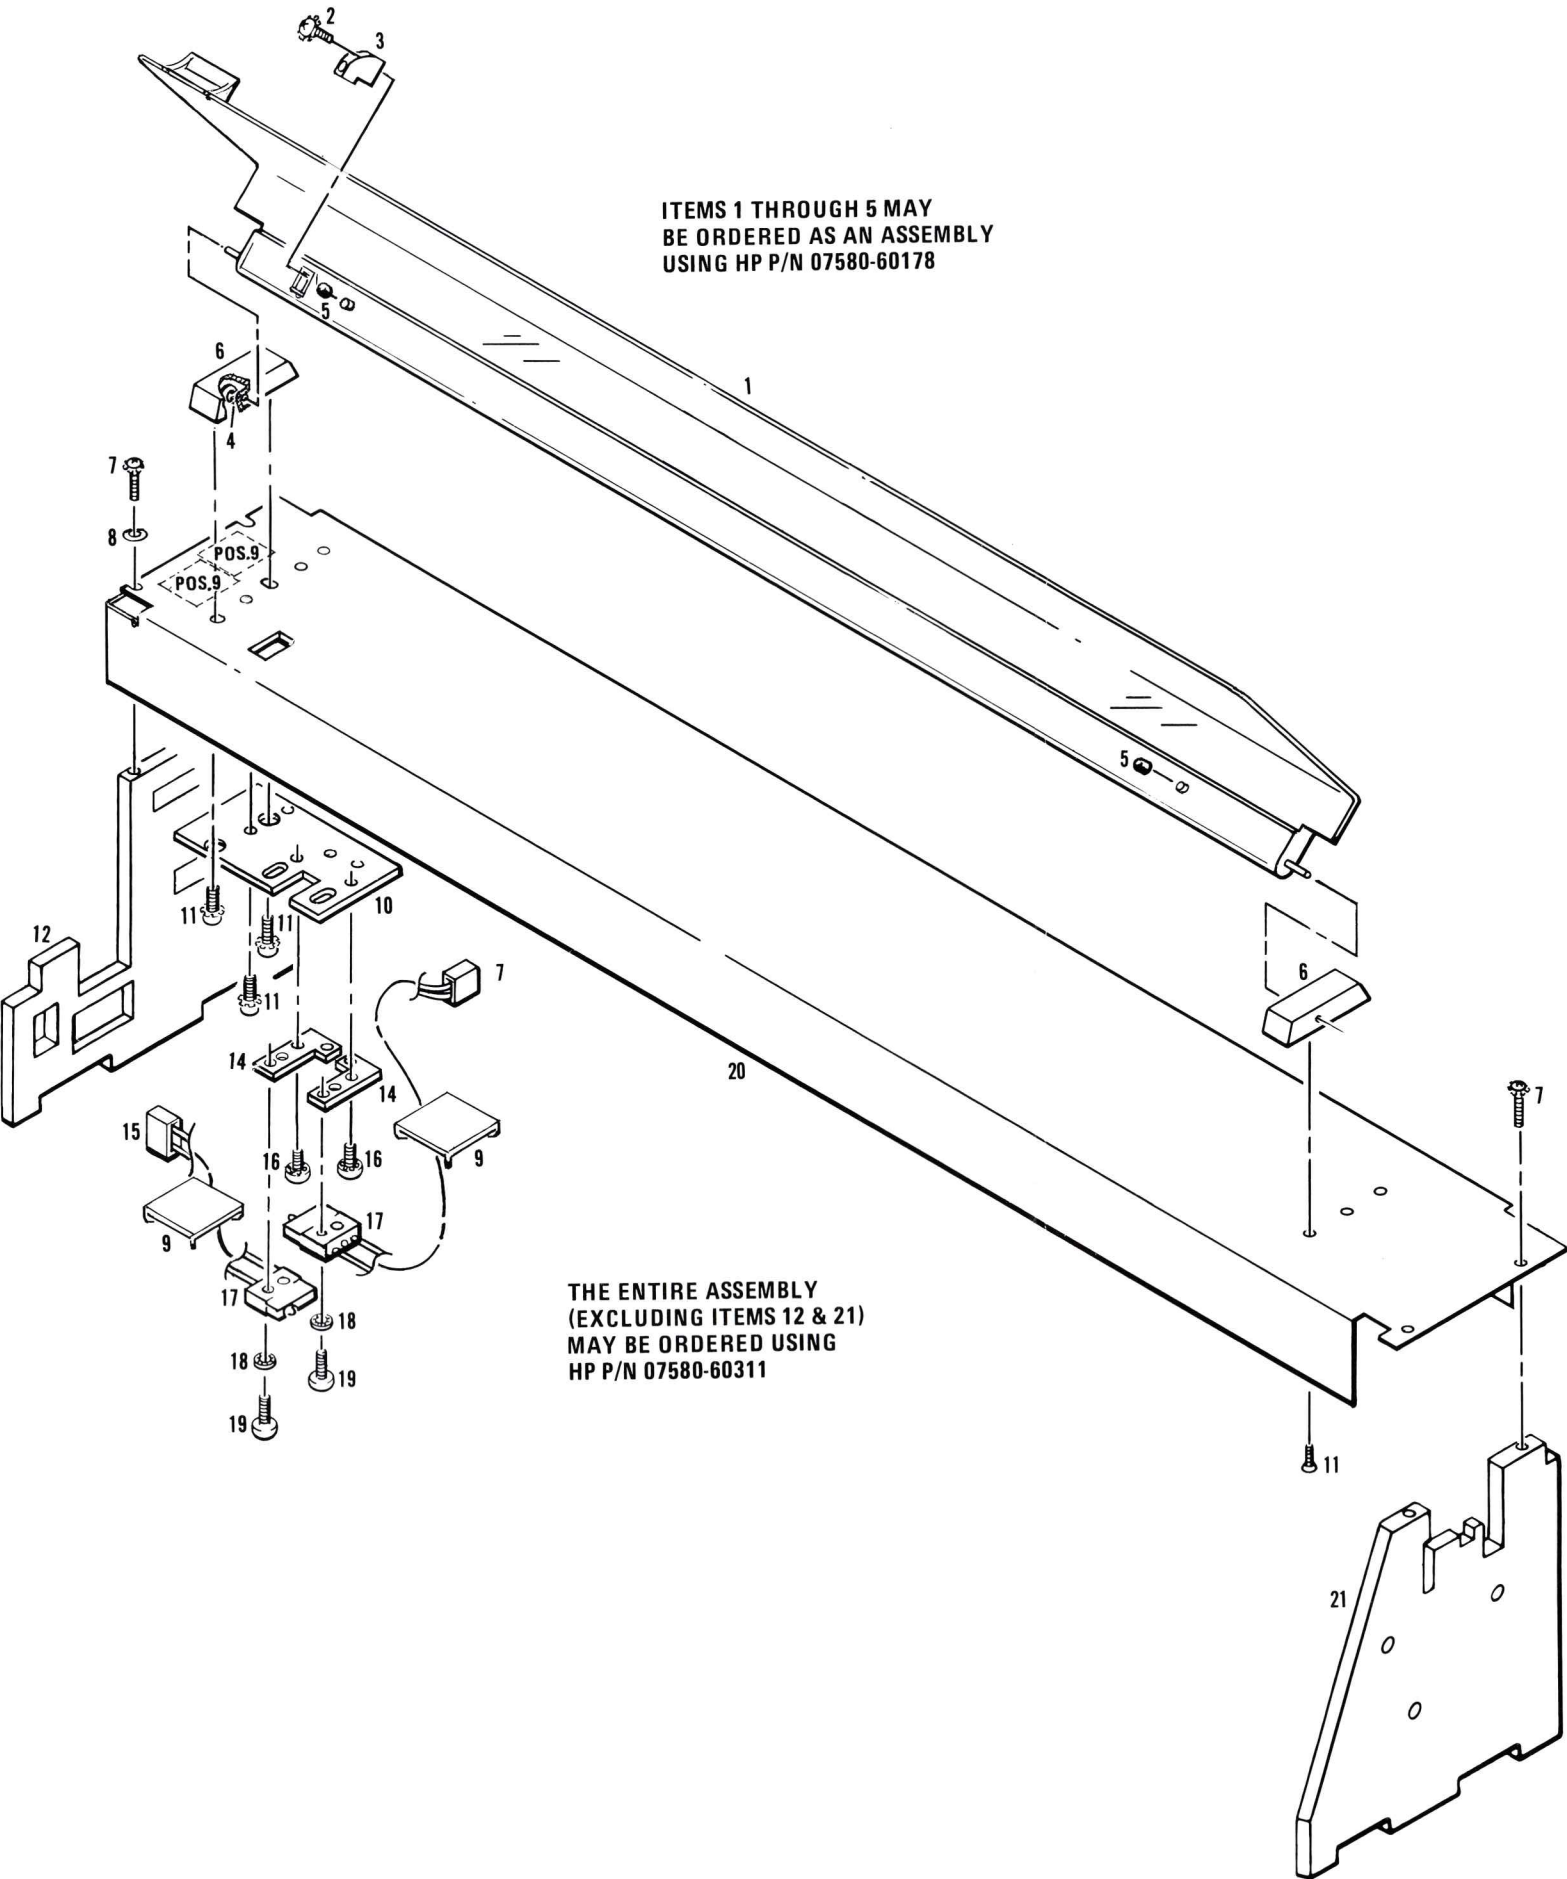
Carriage and Y-Arm Cover Assemblies,
